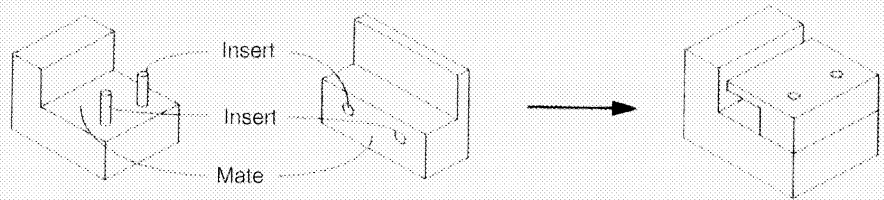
FIGURE J Insert, Insert, and Mate Used to Constrain the Part
